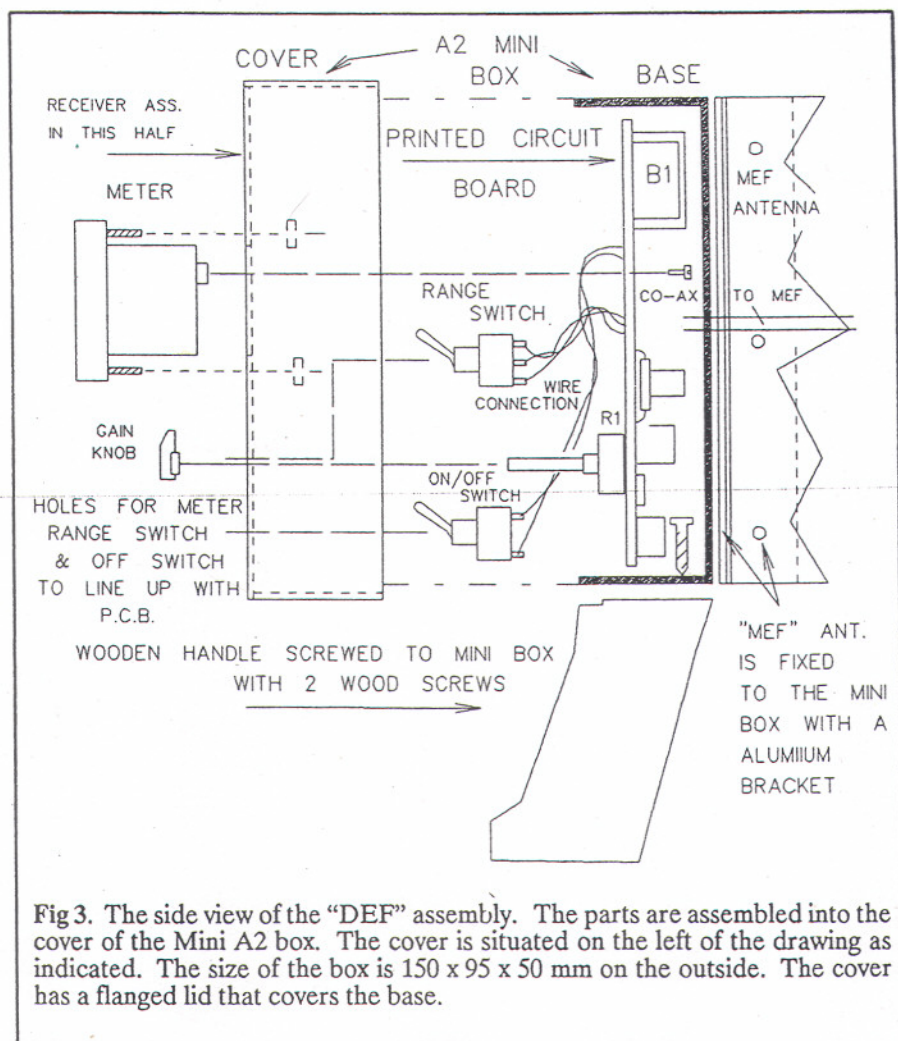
The side view of the "DEF" assembly. The parts are assembled into the cover of the Mini A2 box. The cover is situated on the left of the drawing as indicated. The size of the box is 150 x 95 x 50 mm on the outside. The cover has a flanged lid that covers the base.
